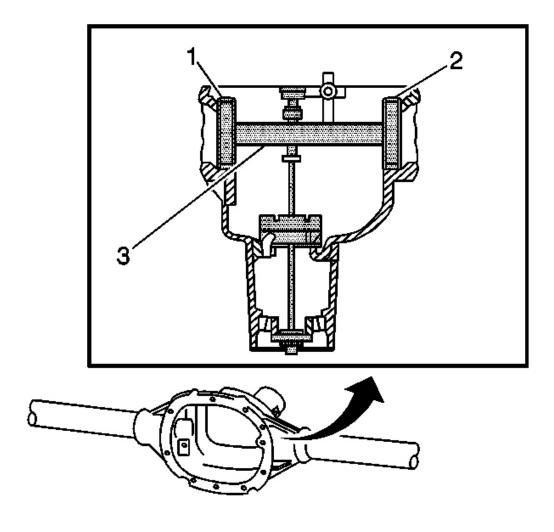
View Of Special Tools In Differential Carrier Bore Courtesy of GENERAL MOTORS CORP.
